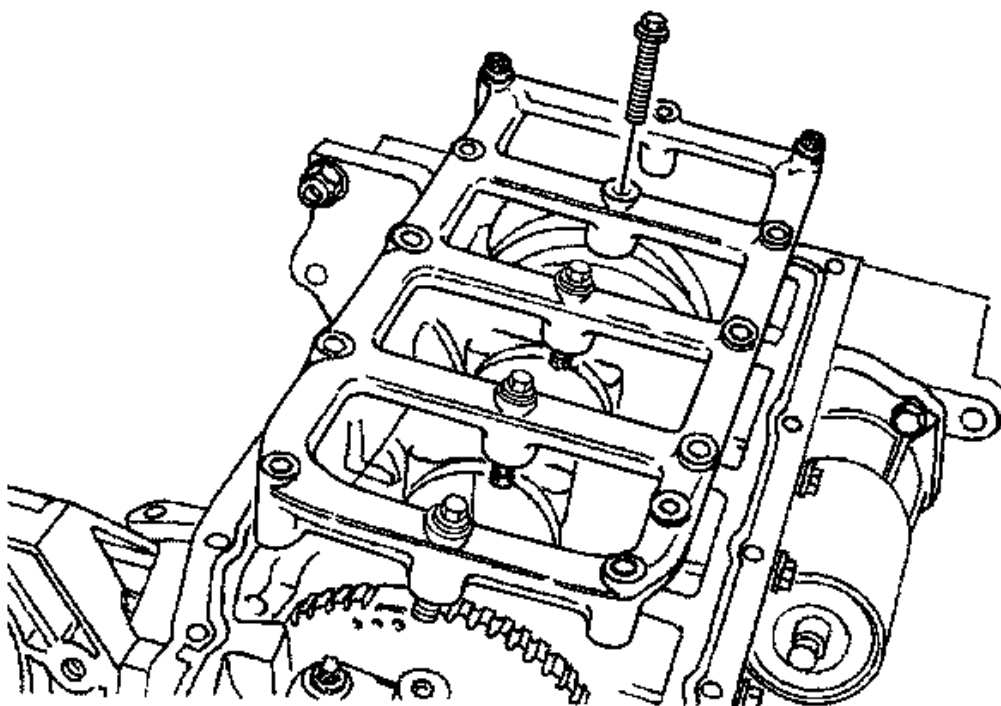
View Of Engine Block Lower Support Bracket And Bolts
